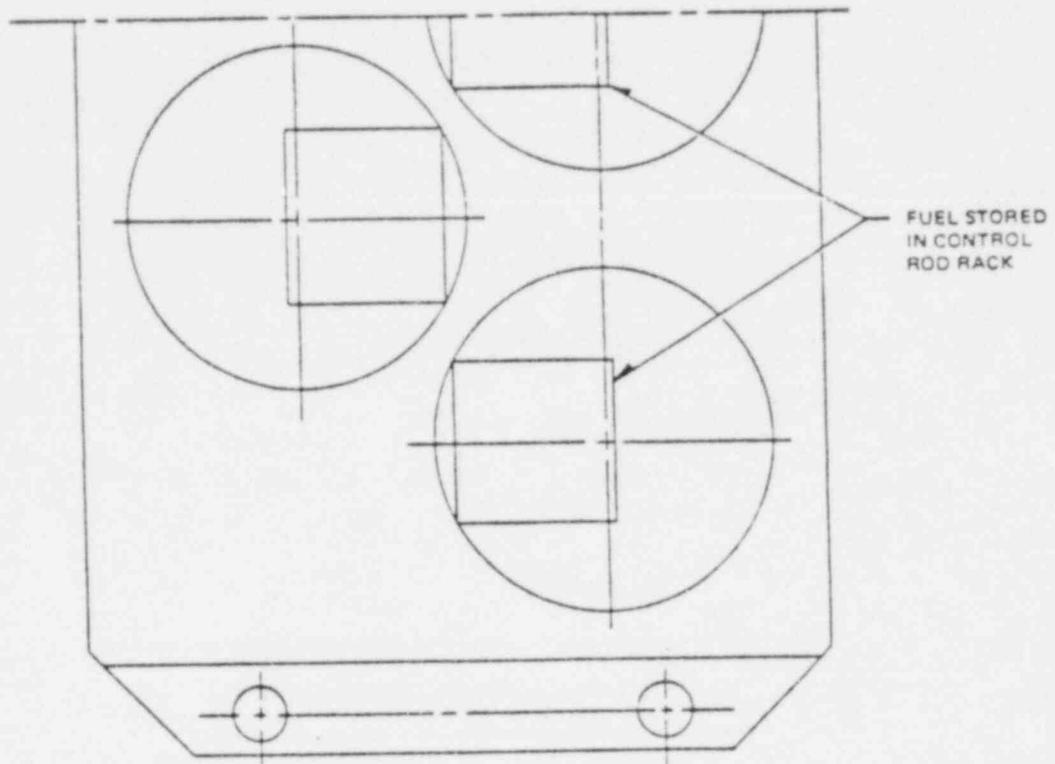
Fuel Stored in Control Rod Racks
